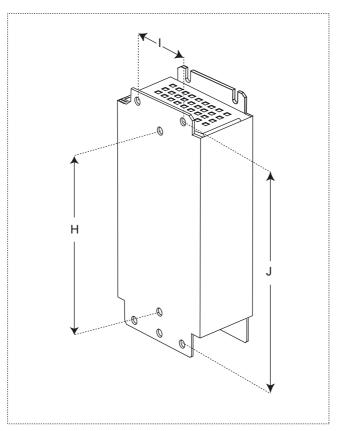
Mounting dimensions of motor reactor, frame size FSA
